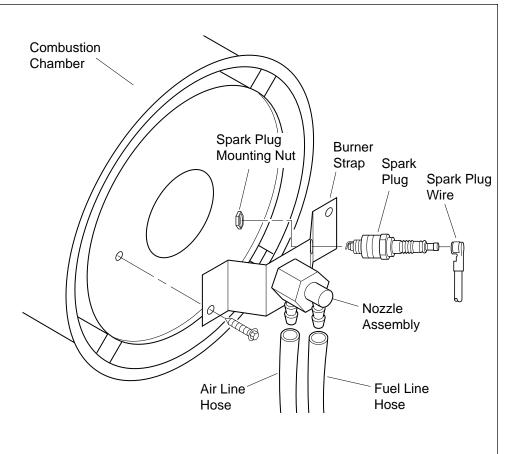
Spark Plug Removal, 8,8 kW (30,000 Btu/Hr) Model
